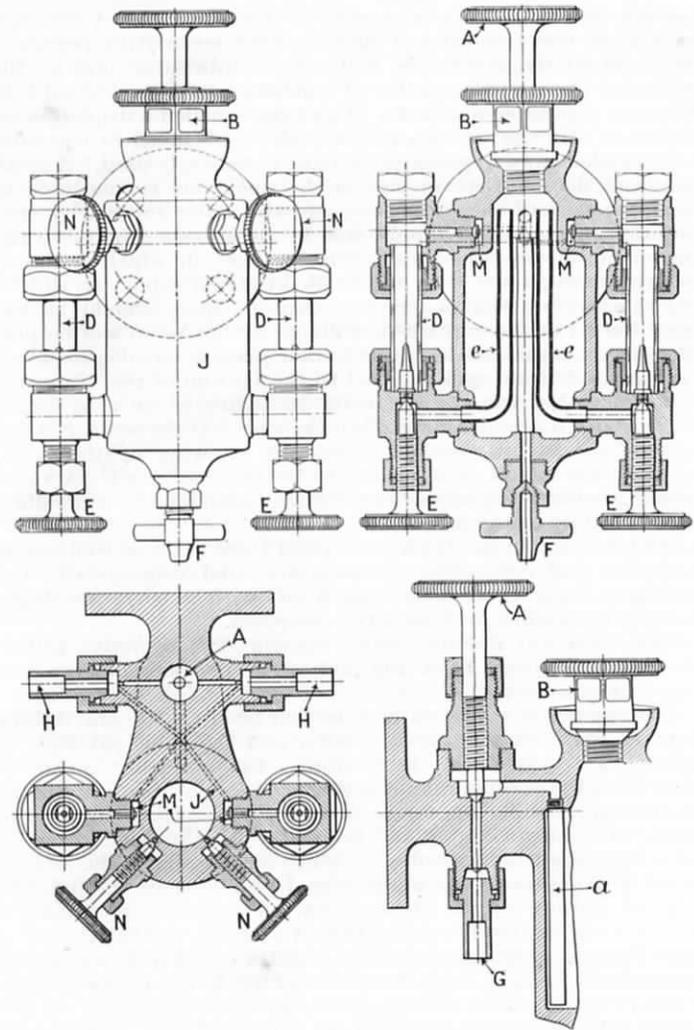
WAKEFIELD DOUBLE SIGHT-FEED LUBRICATOR WITH AUXILIARY FEED.
